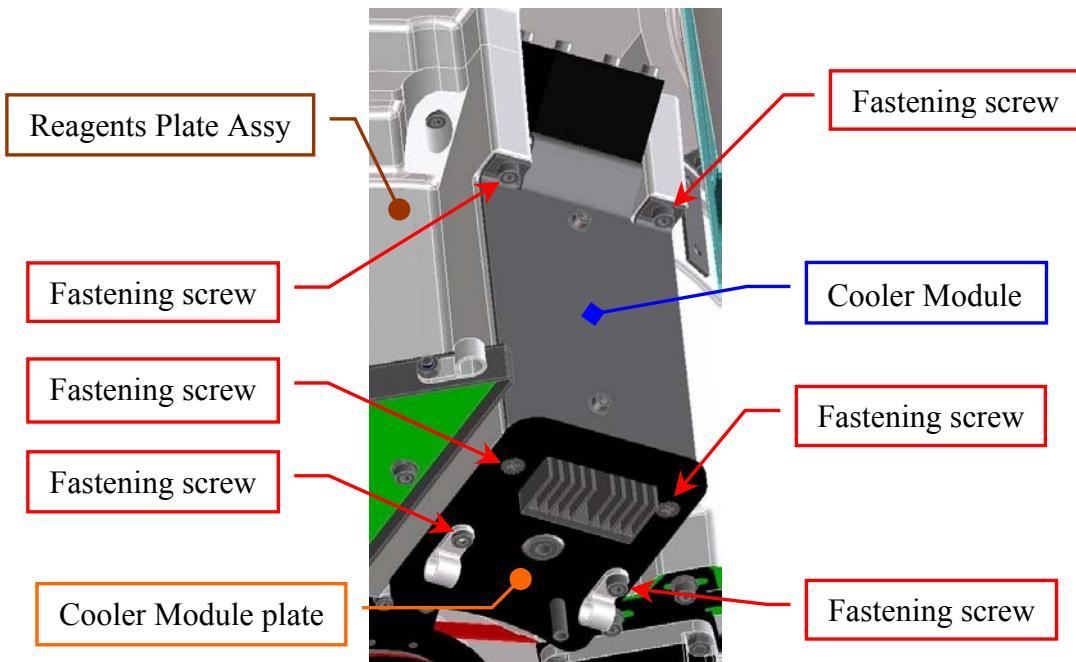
Cooler Module [P/N:10-02536-01] on the Reagents Plate Assy
